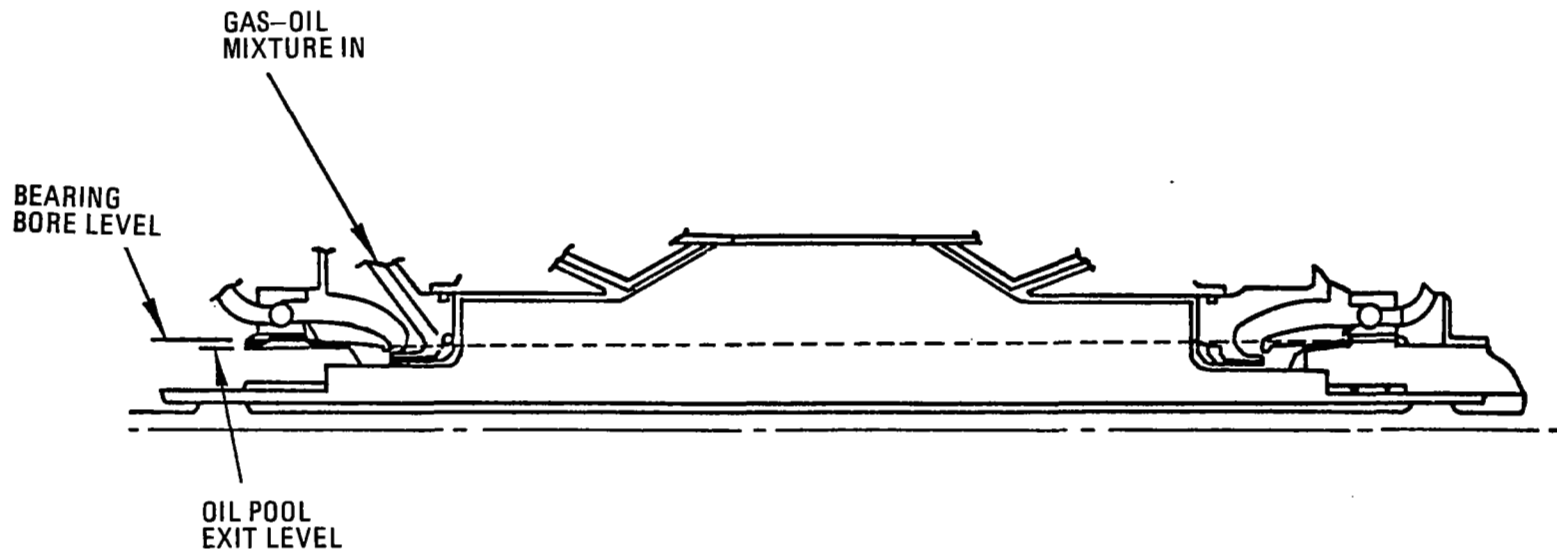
Shaft Section of BRU with Inboard Bearing M-59863
